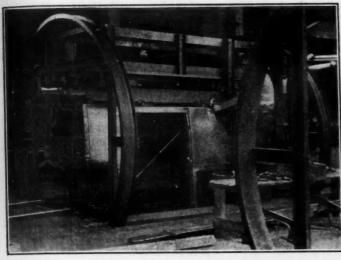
Revolvable Fixture for Nailing Bottom Flanges
